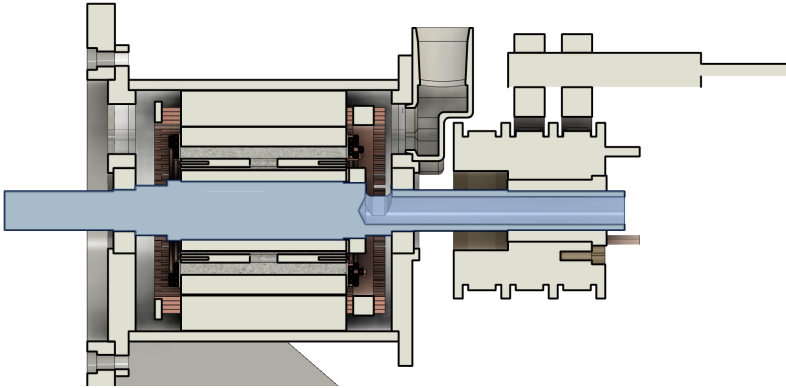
Radial cross section of the 3D CAD model of the prototype, highlighting the shaft in blue.
